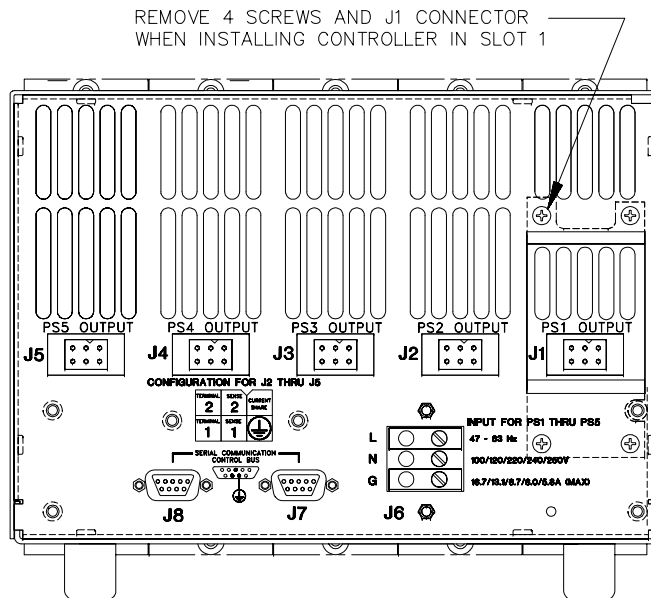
CA 400 BACKPLATE ASSEMBLY
